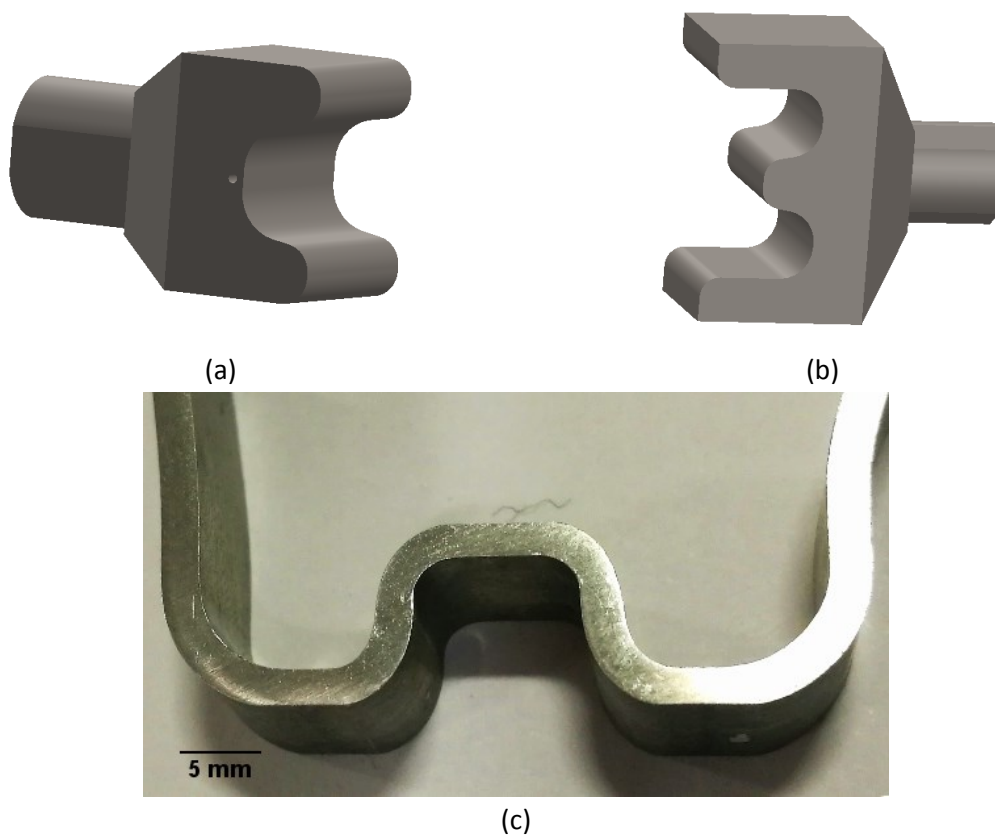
M-shape forming tests: (a) Punch; (b) Die; (c) Formed component.
